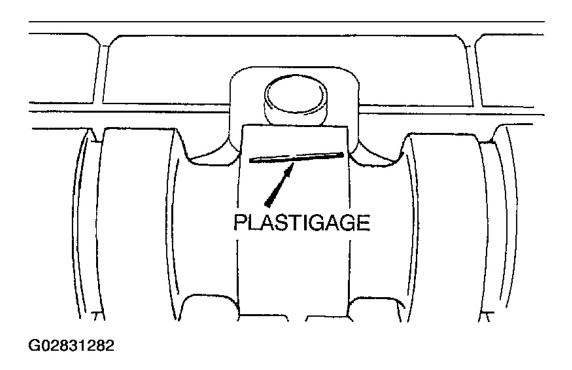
Measuring Camshaft Oil Clearance Using Plastigage Courtesy of MAZDA MOTORS CORP.
